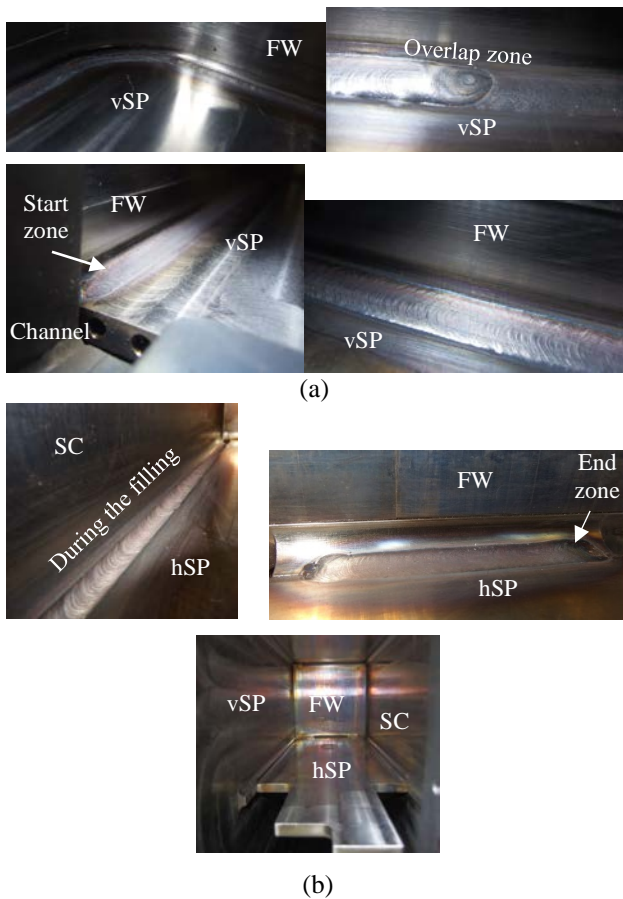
visual inspection of FMU on vSp after welding (a) and hSPs during and after welding (b)
